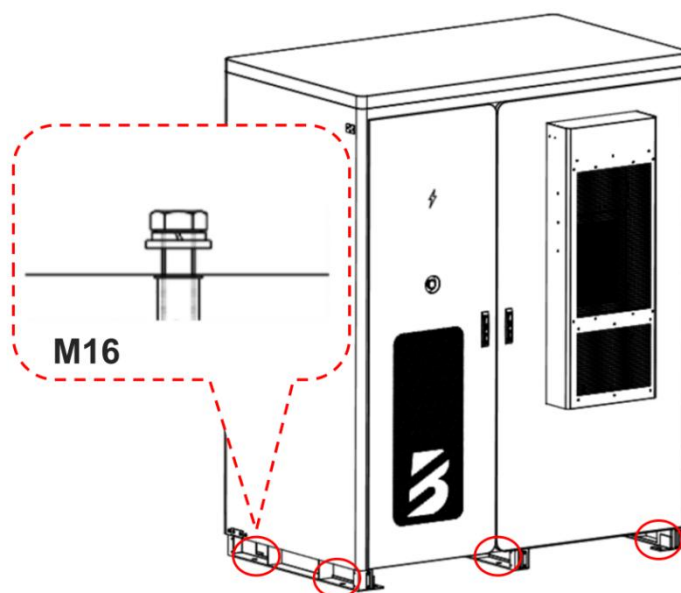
Schematic Diagram of Bolt Tightening at the Bottom of the Equipment
